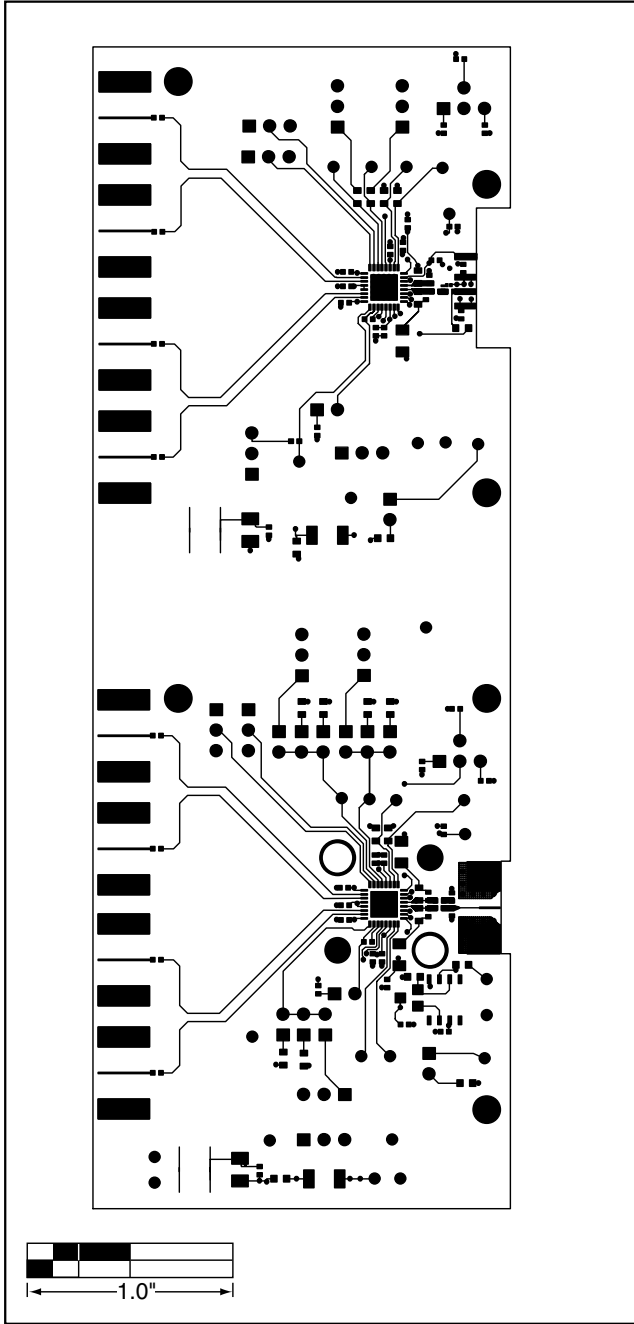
MAX3863 EV Kit PC Board Layout—Component Side
